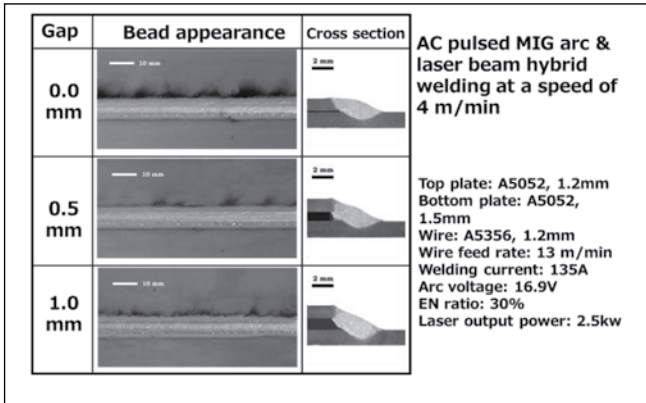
High speed welding results of aluminium alloy lap fillet joint by laser-AC arc hybrid process.
